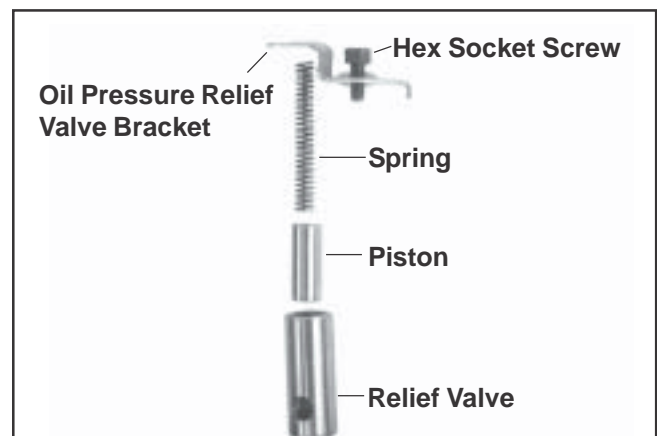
Installing Oil Pressure Relief Valve Body, Plunger, and Spring.
